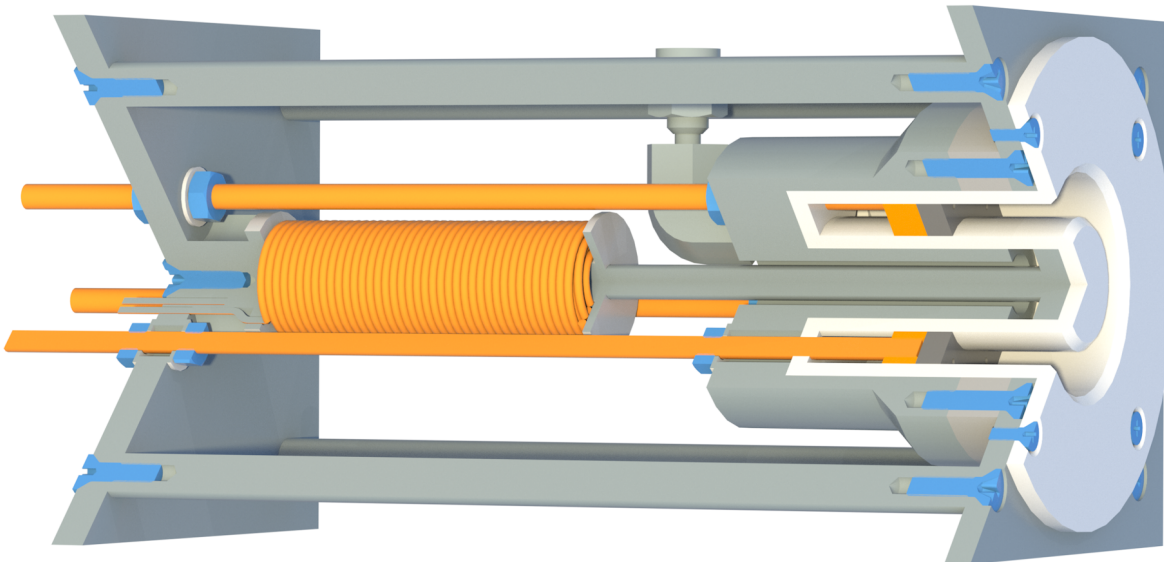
Cut section view of the assembled Hall Thruster with step-less adjustment of channel depth
